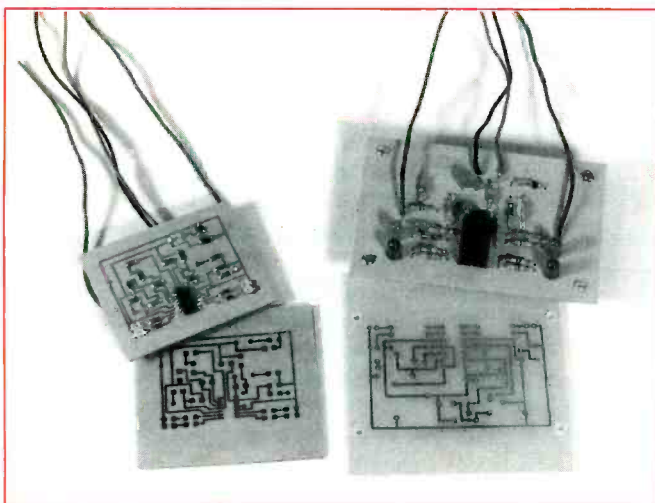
Examples of surface-mount (left) and through-hole (right) circuits and pc boards.
